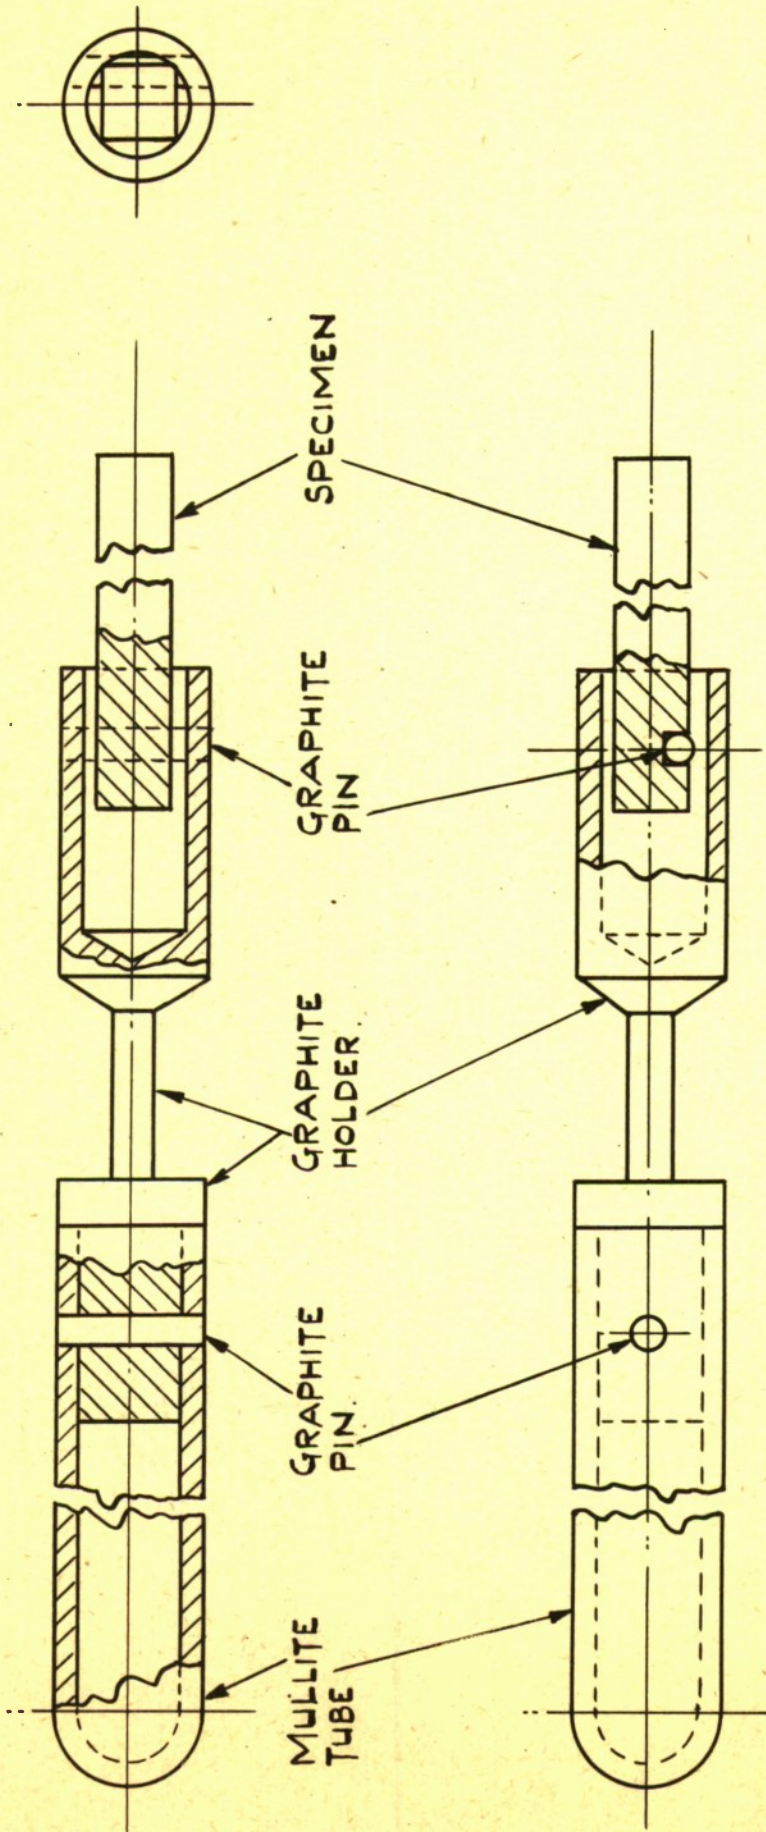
SPECIMEN AND HOLDER ASSEMBLY
